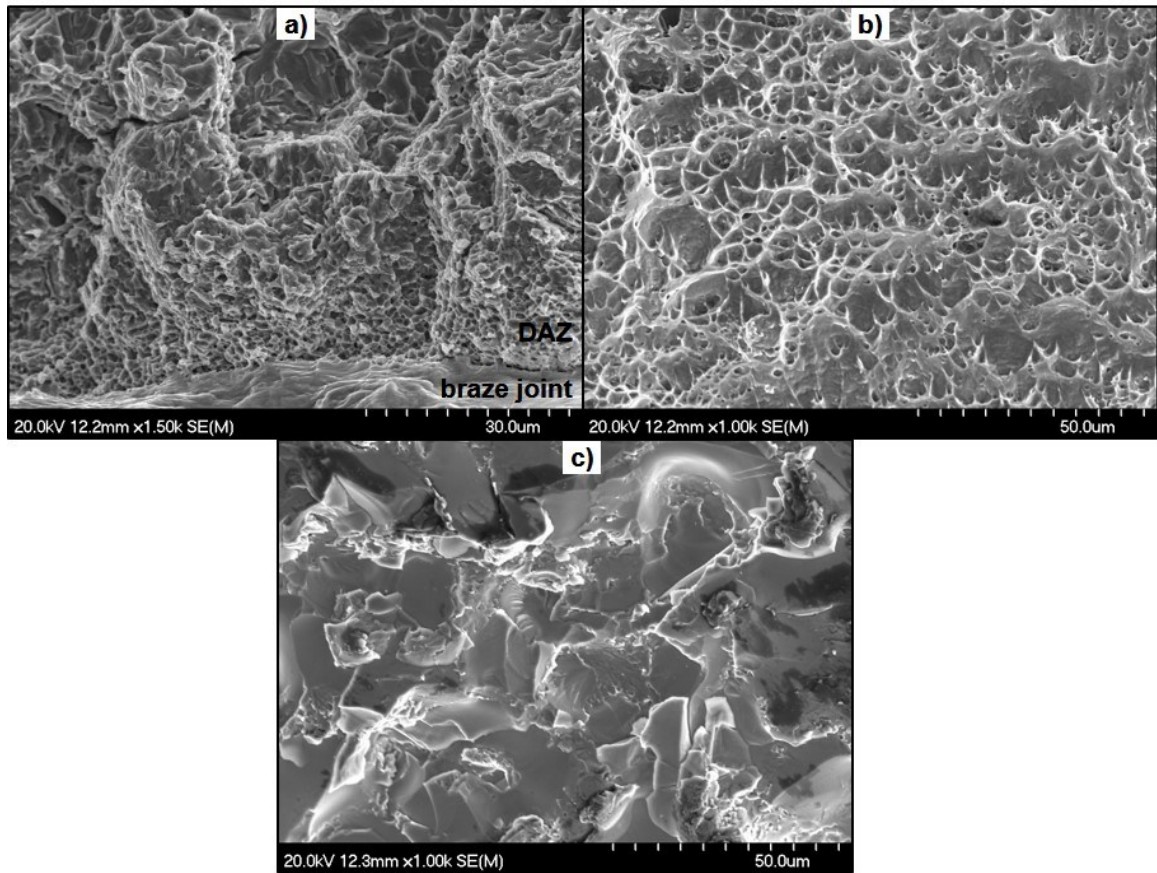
SEM micrographs of BNi-2/IN625 (B3) shear specimen fracture surface. Fracture surface of a) braze joint and DAZ of IN625 b) IN625 (unaffected by braze joint), and c) back fillet of joint.
